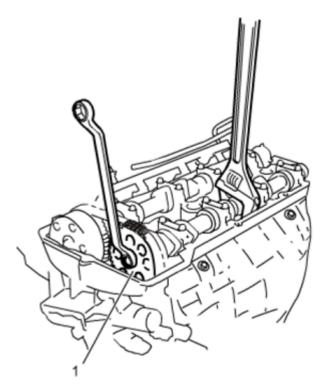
Removing Exhaust Camshaft Timing Sprocket Bolt Courtesy of SUZUKI OF AMERICA CORP.
